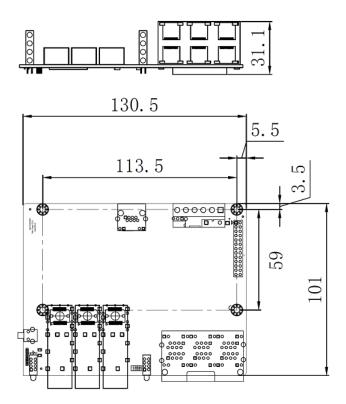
Dimensions for SICOM3000BA (bare board, 3.3DC/5DC)
